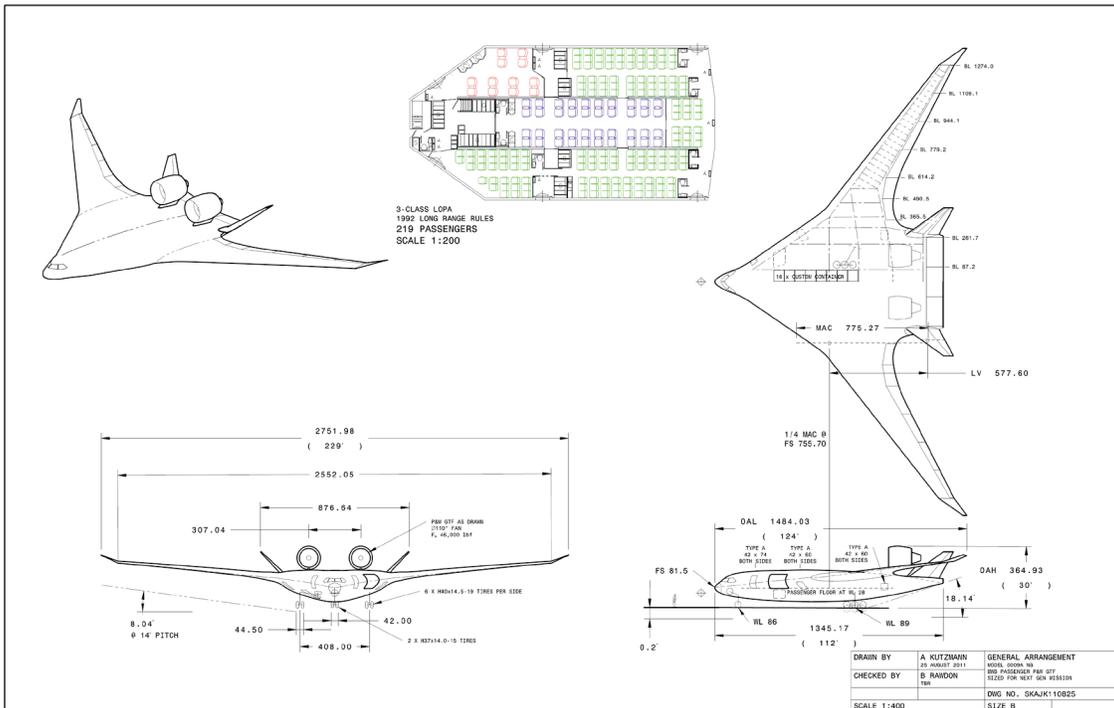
General Arrangement Drawing – 2025 BWB-0009A NG Passenger
